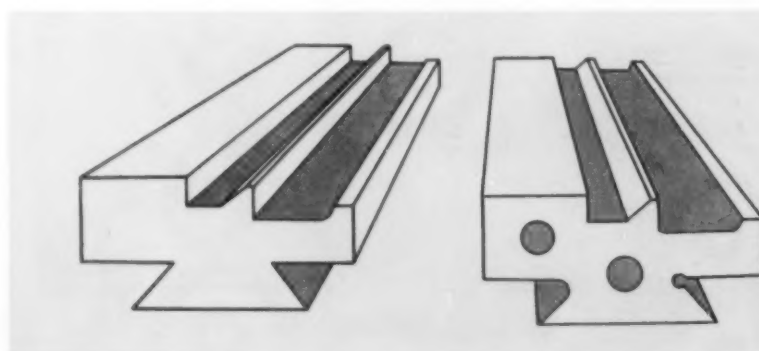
As initially designed, left, this high-speed steel form cutter would be difficult to heat treat. Two types of radii are shown at right, either of which would improve the design. The two added holes make section thickness more uniform.
